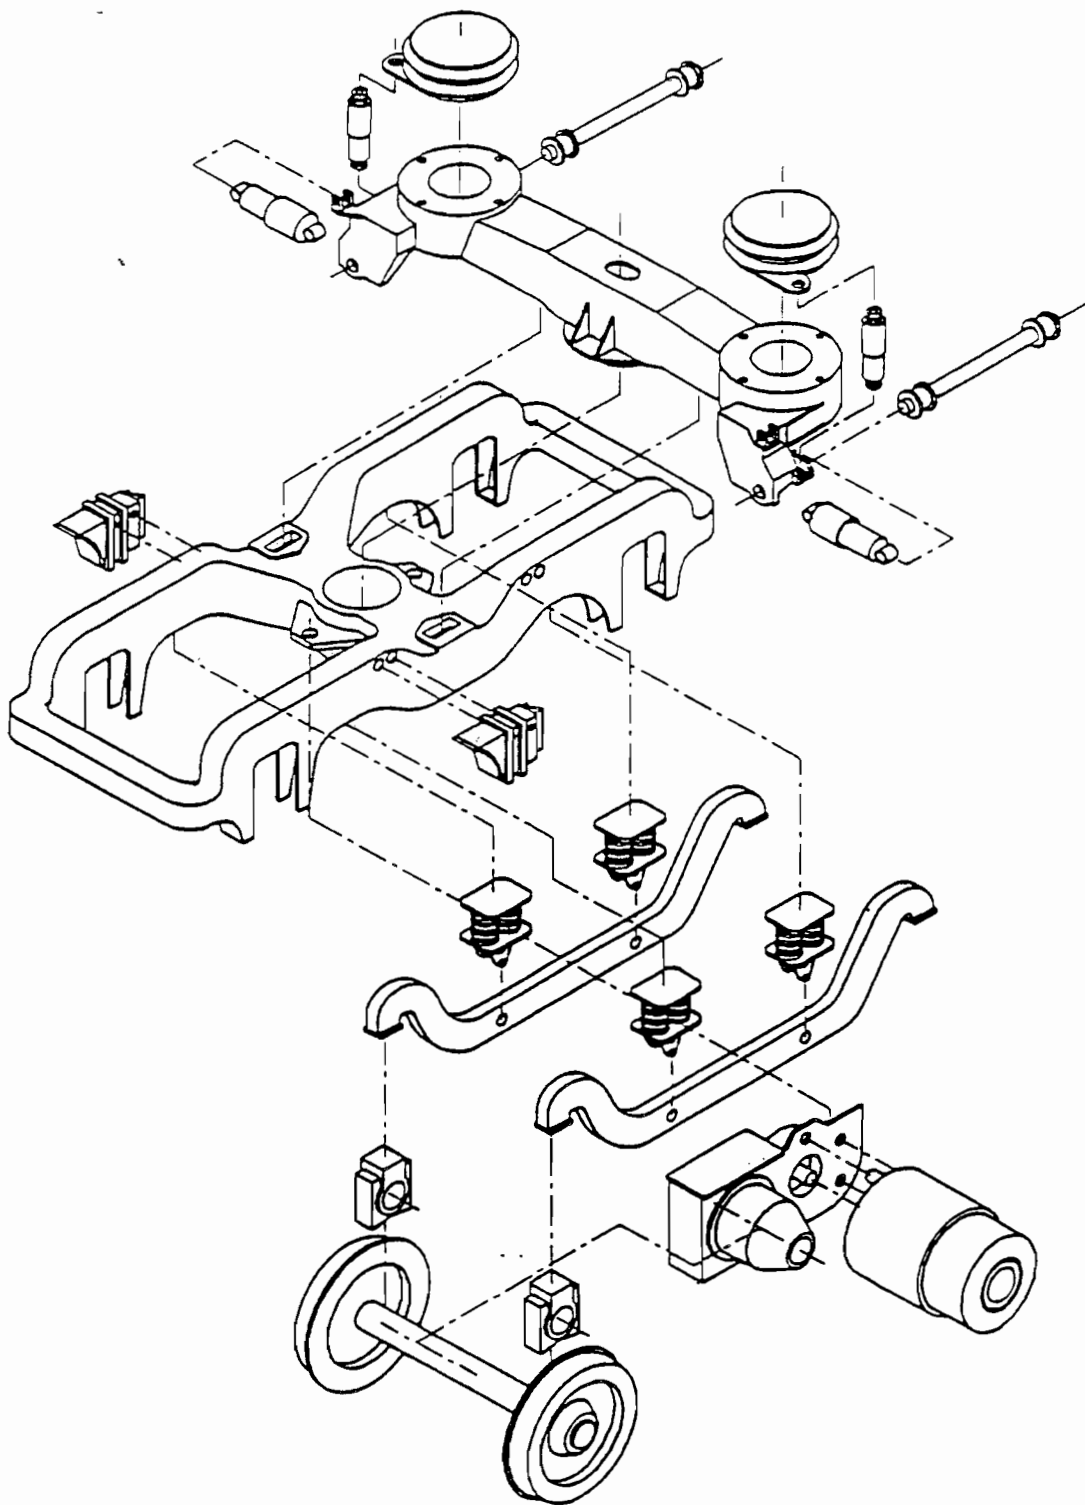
GSI Truck for Budd M3 for Long Island RR - Exploded View
